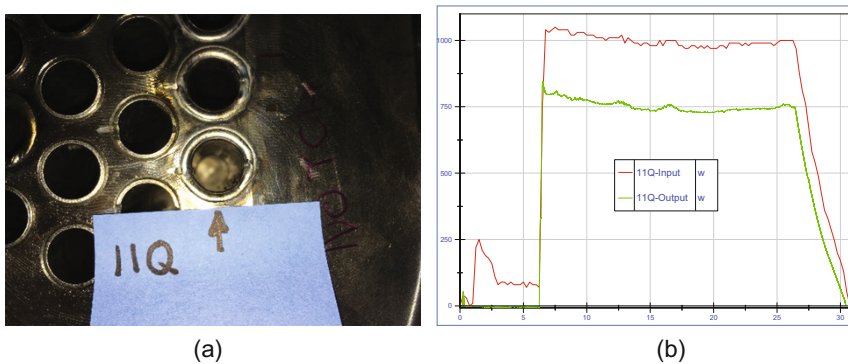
(a) Picture of a pool weld of a 316 L test structure representing the heat exchanger component found in a Nuclear reactor construction, (b) Power demanded by welding machine (in red) vs power delivered to weld (in green) $\eta = 75\%$
